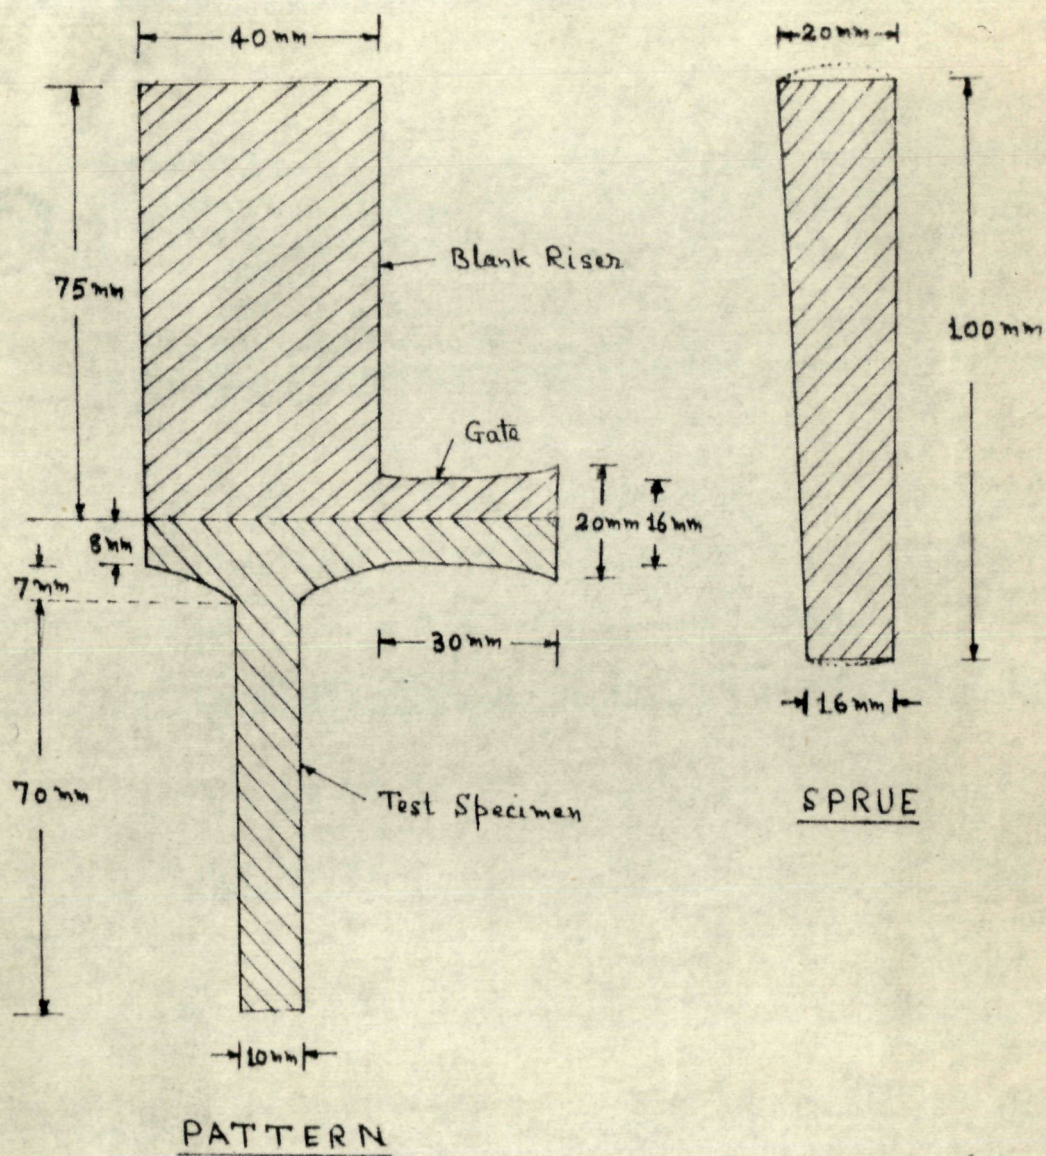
(b) - Actual Dimensions of Pattern and Sprue
